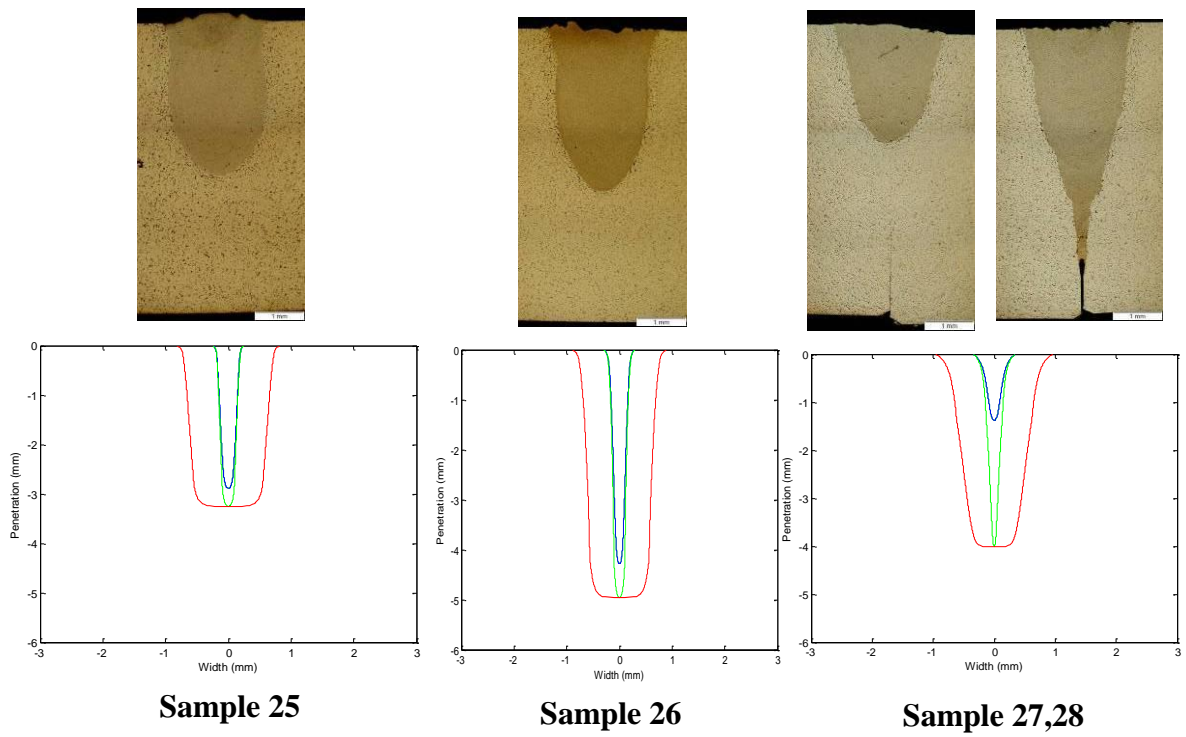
Comparison between Experimental and Calculated Weld Geometry for the 6 mm Laser Welded Plates
